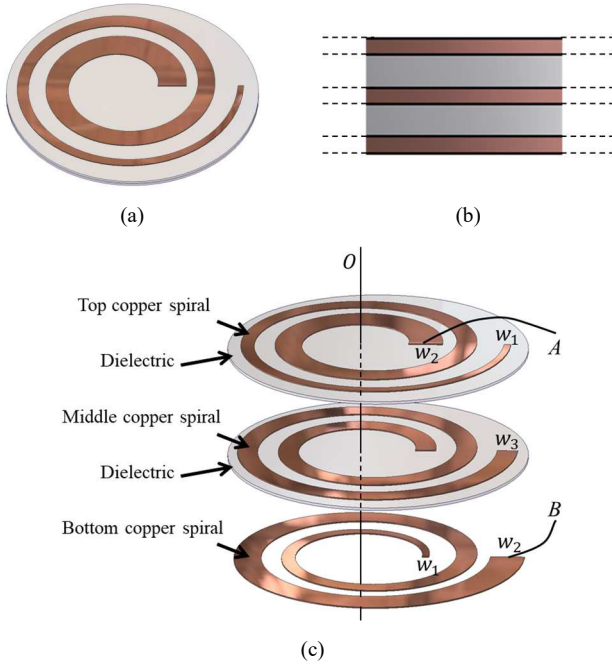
Three-layer non-uniform SR coil structure (a) 3D view (b) side view (c) exploded 3D view [18]
